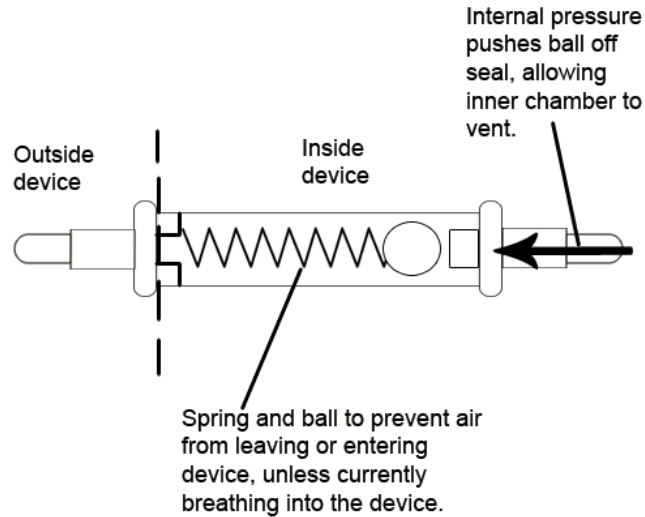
Original drawing showing mechanism of a ball spring check valve.
